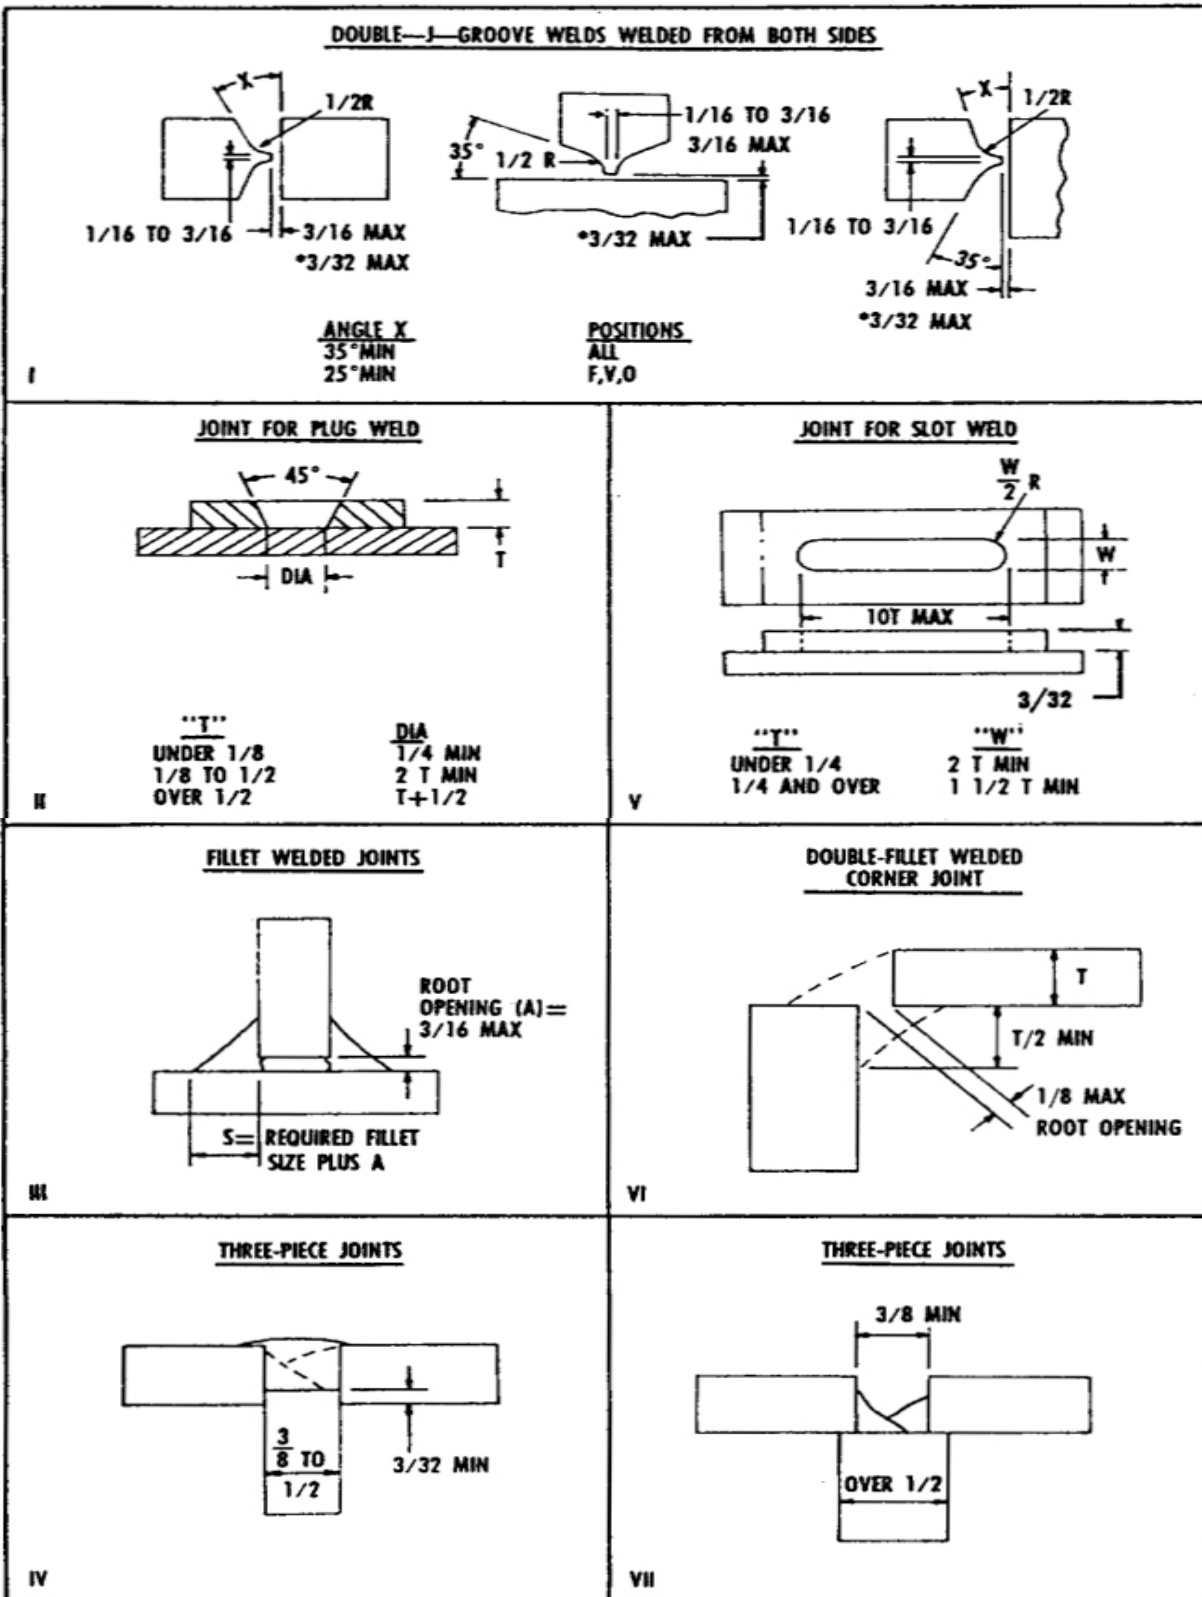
Recommended proportions of grooves for shielded metal-arc, gas metal-arc, gas tungsten-arc, flux-cored arc, and gas welding (except pressure gas welding). Note: Dimensions marked * are exceptions that apply specifically to gas metal-arc welding [59].
